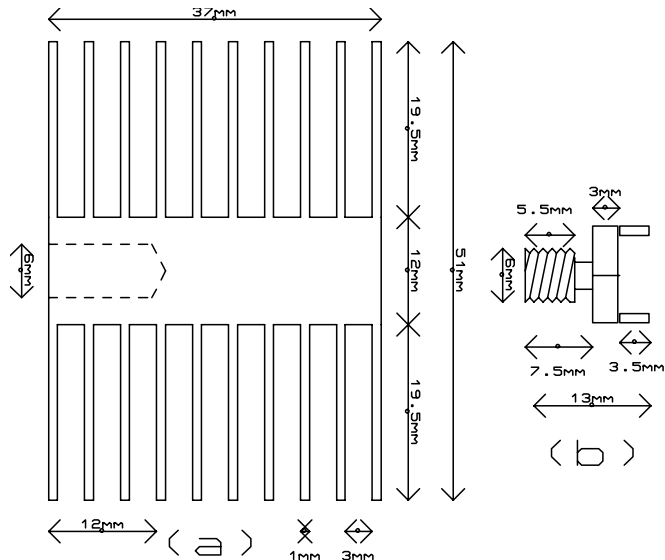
Project of a heatsink. In (a), the heatsink and in (b), the union part between L6208N and the heatsink.
